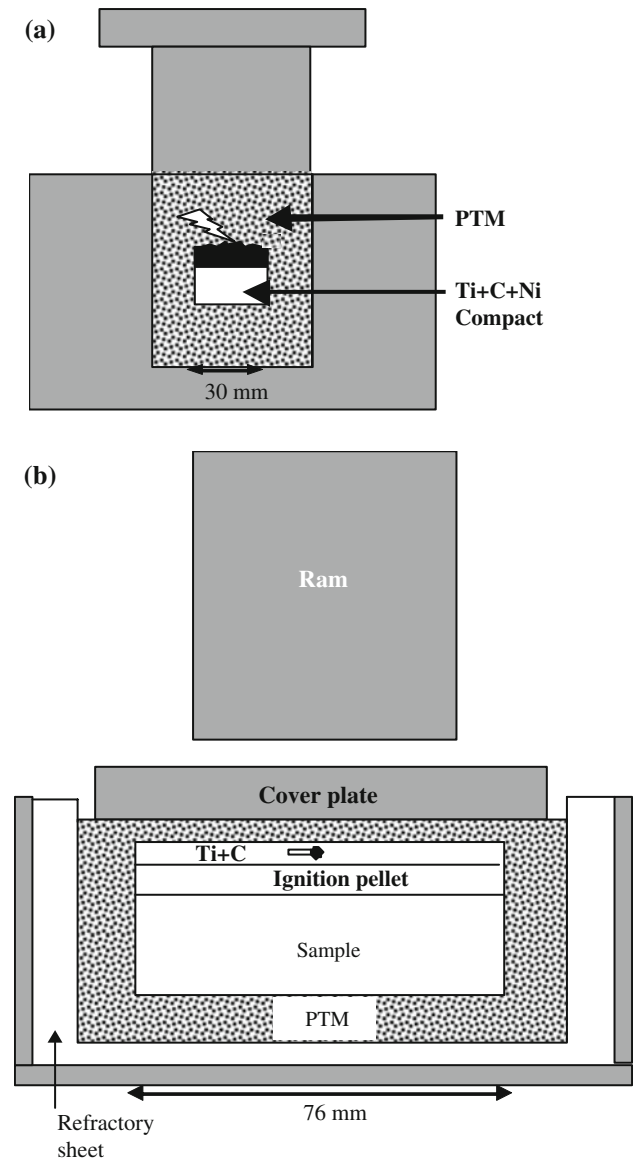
Containment fixture for samples with (a) 3 cm diameter and (b) 7.6 cm diameter
